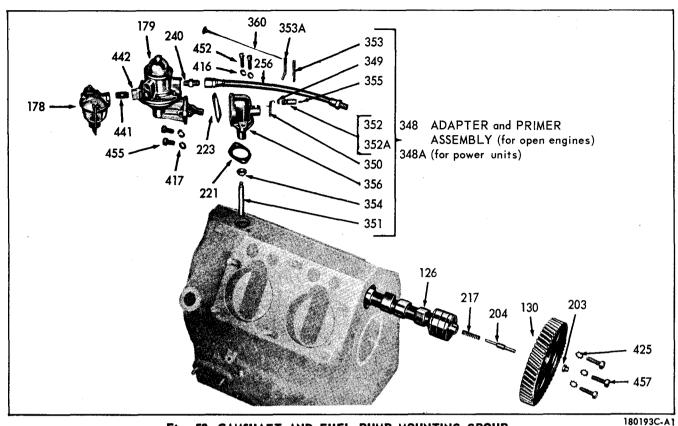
, CAMSHAFT AND FUEL PUMP MOUNTING GROUP
